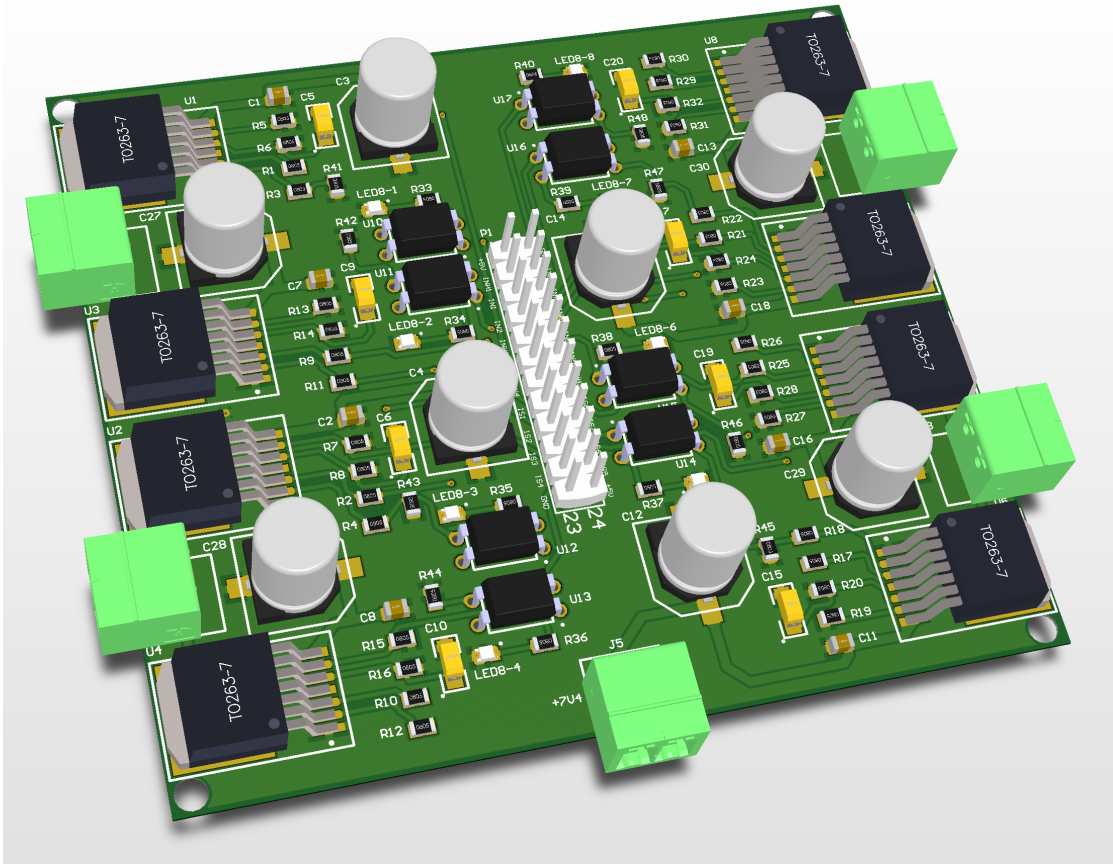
NON-A blimp V2 motor driver board (first version) design 3D view
